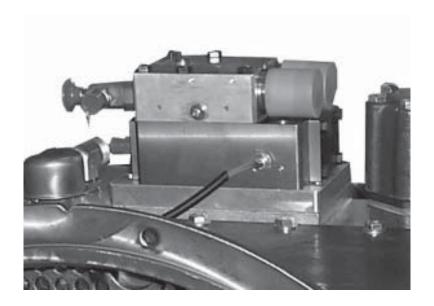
GP Valve Assembly mounted on Marine Transmission.
